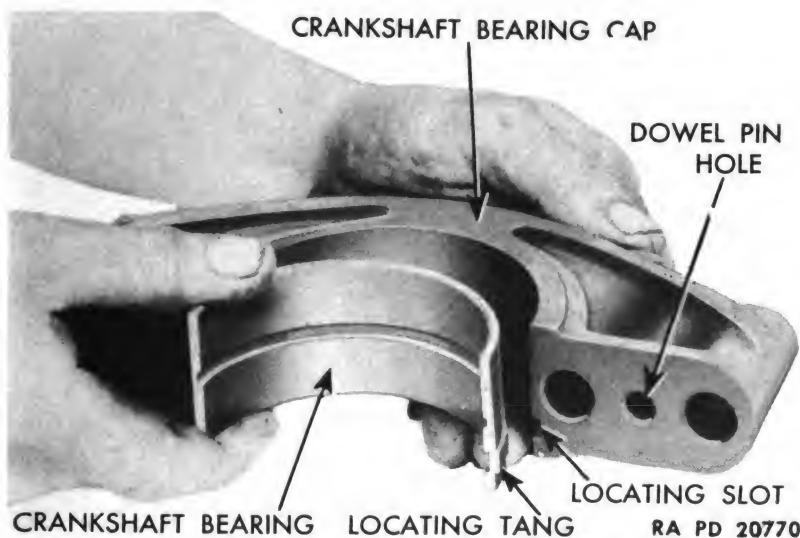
Removing Crankshaft Bearing from Bearing Cap
